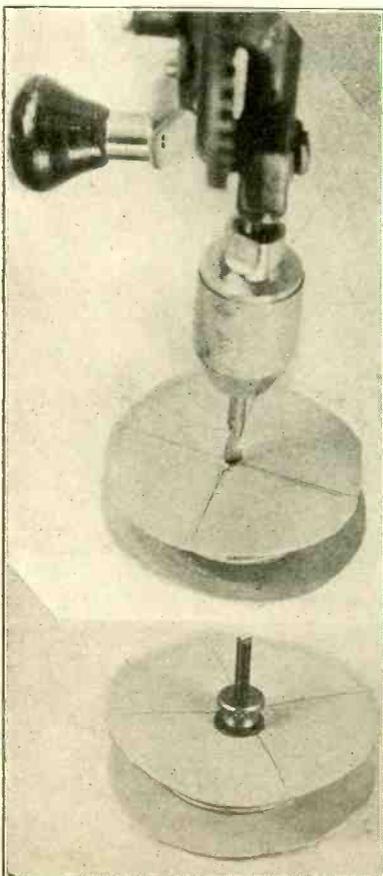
, center the larger circle and make a hole with a No. 27 drill. Next (Fig. 6) put a $\frac{6}{32}$ " screw in the hole and fasten tight.
